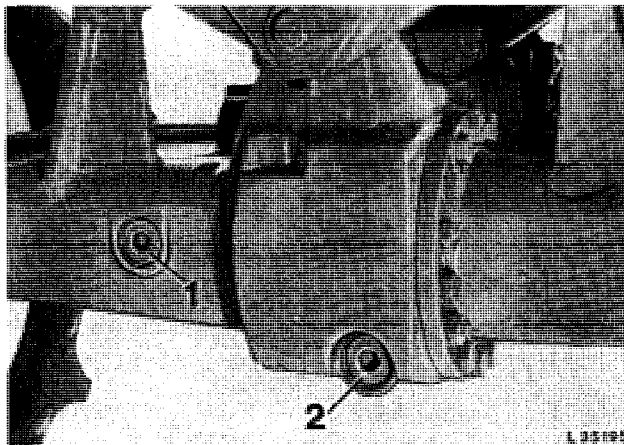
Axle Housing (from Serial No. 450 000 L)
